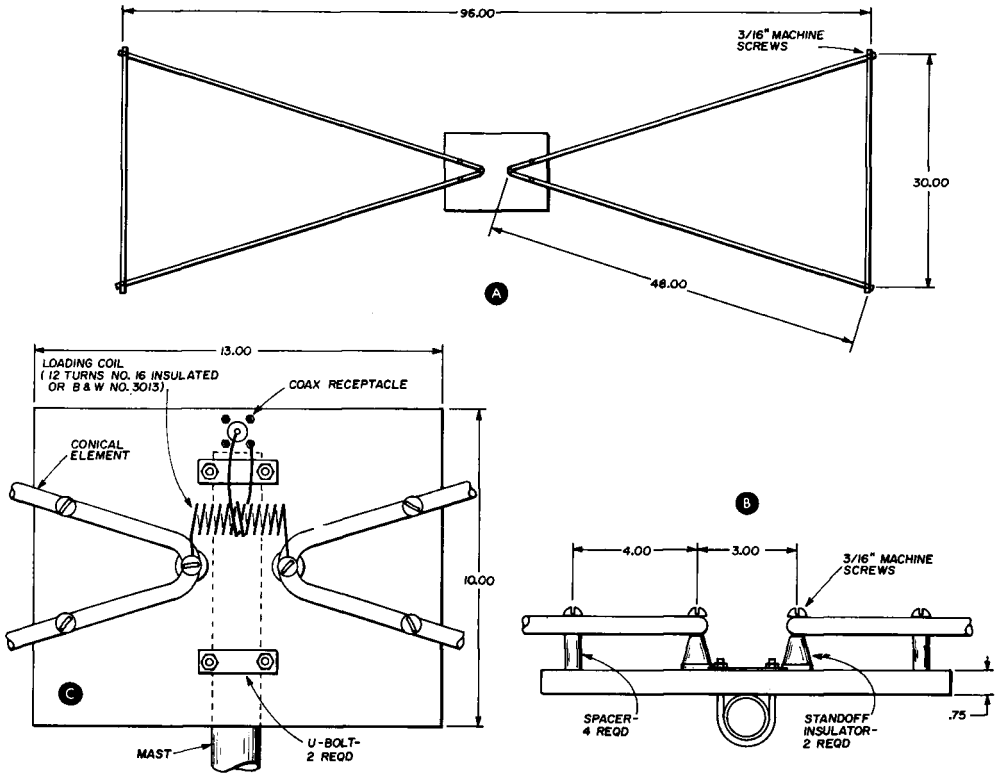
Dimensions, A, and mounting details, B, of the Wonderbar beam driven element. Mounting base is a simple pine board.
